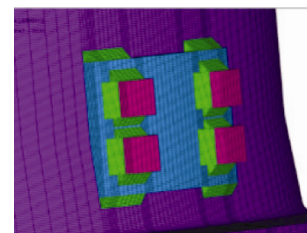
3D finite element model of weld pads in the nozzle convergent for mounting SITVC tanks.
